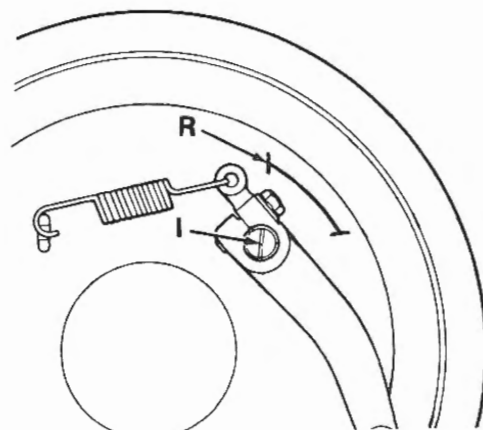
Indicator mark (I) on rear brake shoe cam should be within range (R) when brakes are applied for brake linings to be considered satisfactory.
